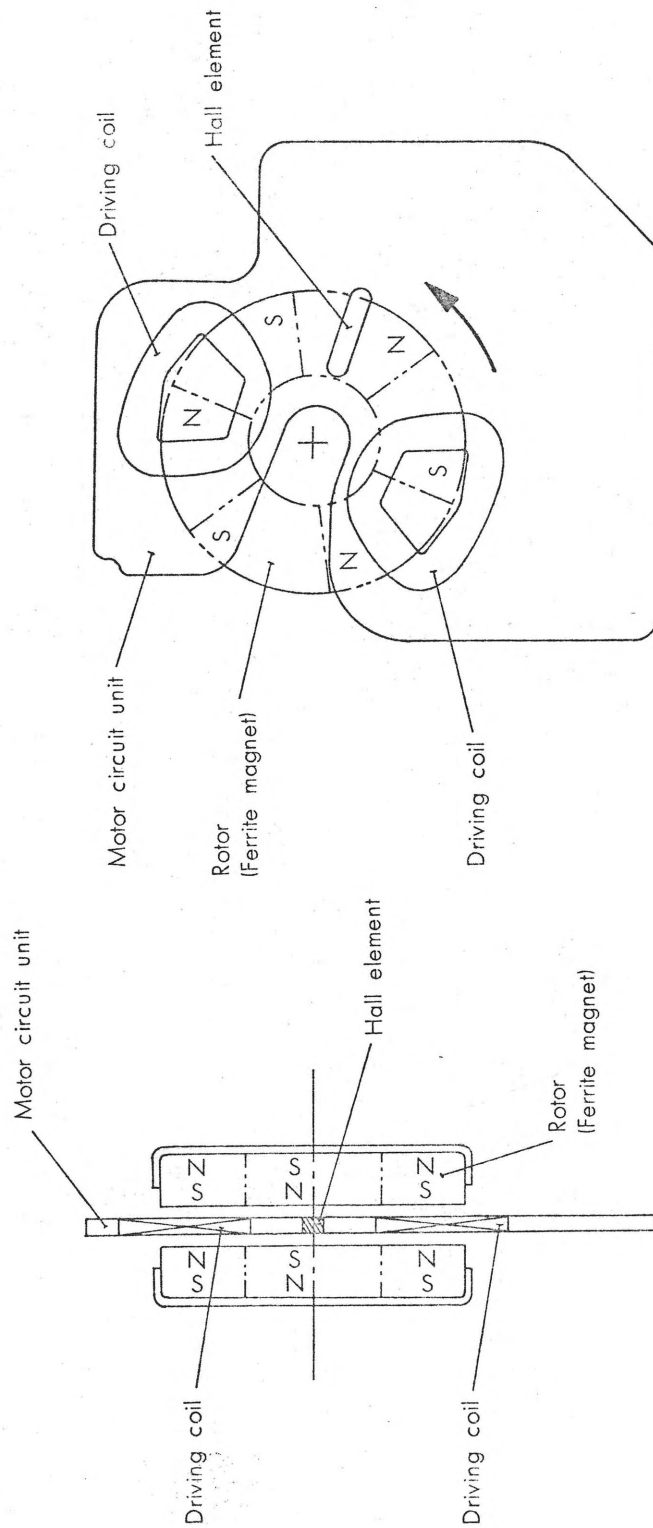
MOVEMENT OF MOTOR MECHANISM
